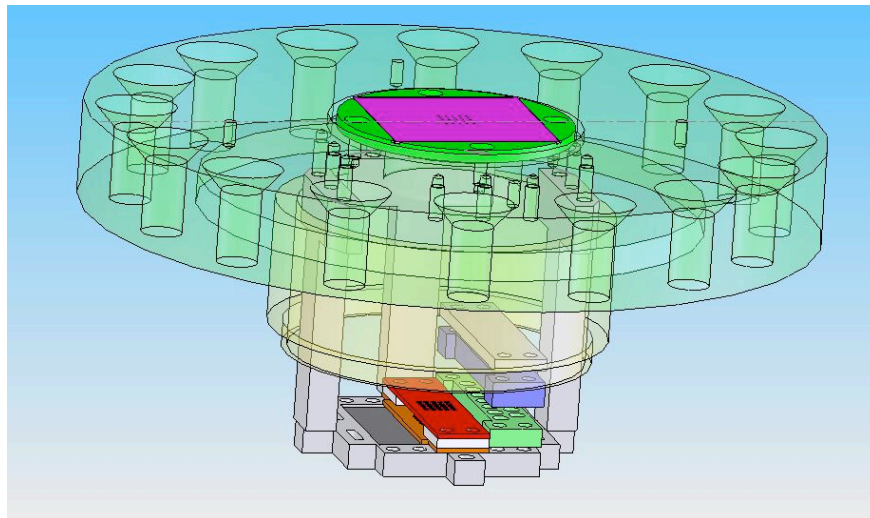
Solidworks rendering of multi-pixel cathode assembly as connected to the anode flange and irradiation window array. The cathode is placed in a recessed area (dark gray) near the bottom of the assembly. A gate electrode (orange), focusing electrode (red) sit centrally while interconnect elements, (green, blue) are positioned on outside. Teflon legs attach and provide alignment to the anode flange (top, green), and the 5x5 array window (purple) is attached to the anode via the mini-flange (opaque green).
